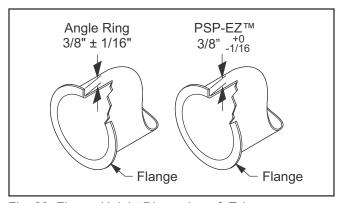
Flange Height Dimensions & Tolerances
